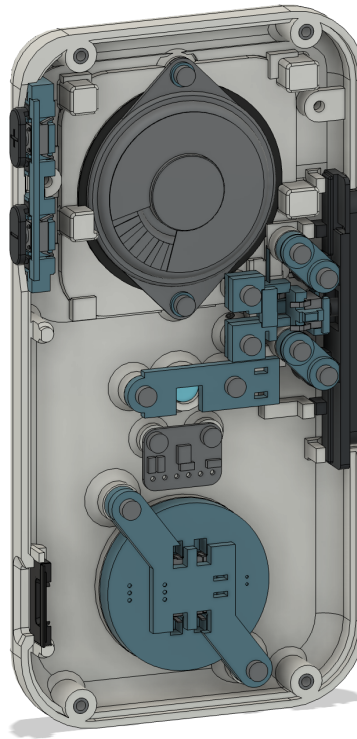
Mechanisms exposed for inspection; hidden items are not removed from the CAD file.
